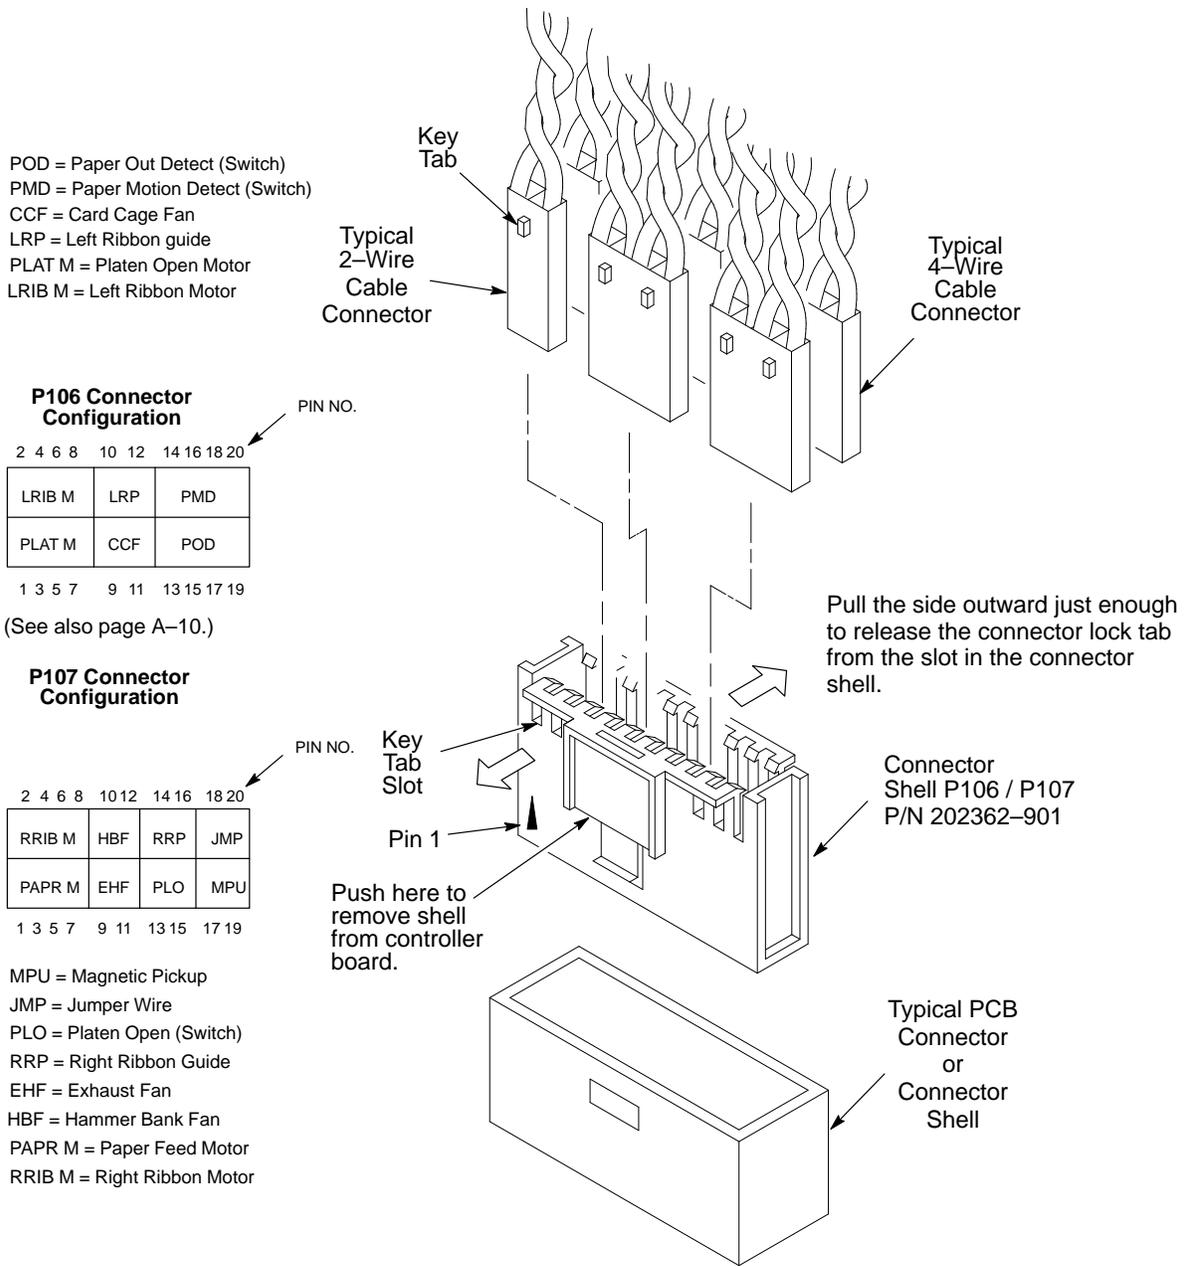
Cable Shell Connector, Disassembly/Assembly
